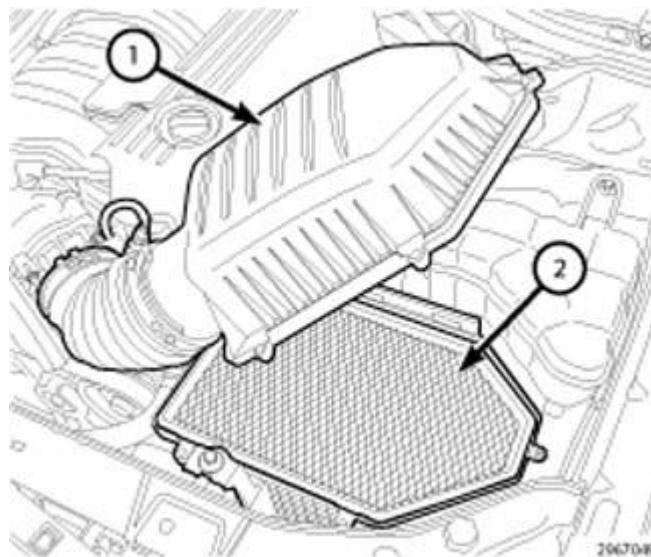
Air Cleaner Housing Cover & Air Cleaner Element
